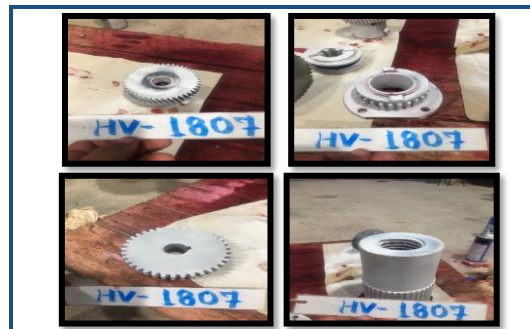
Inspection by Penetrant Testing ( PT Test ) Gear Shaft Motor
